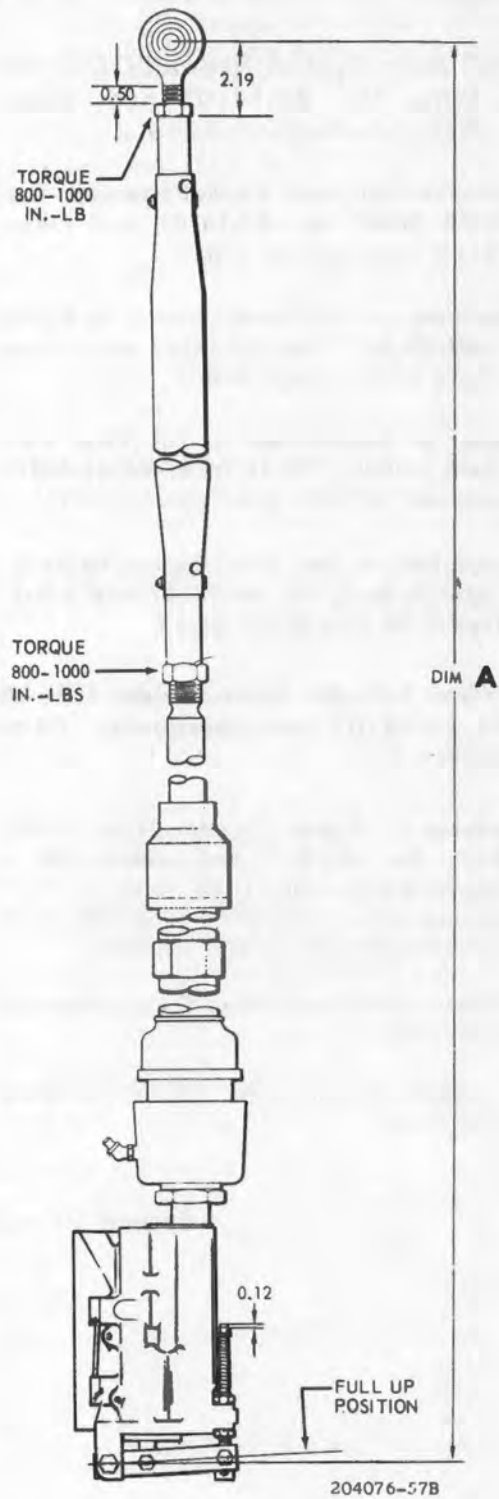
Cylinder assembly dimensions (UH-1B serial no. 64-14101 and subsequent)
